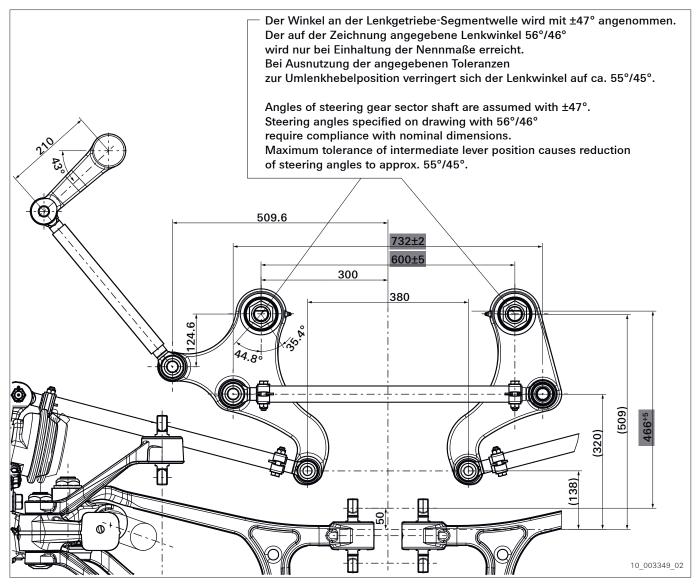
Example RL 75 EC Excerpt from installation drawing
